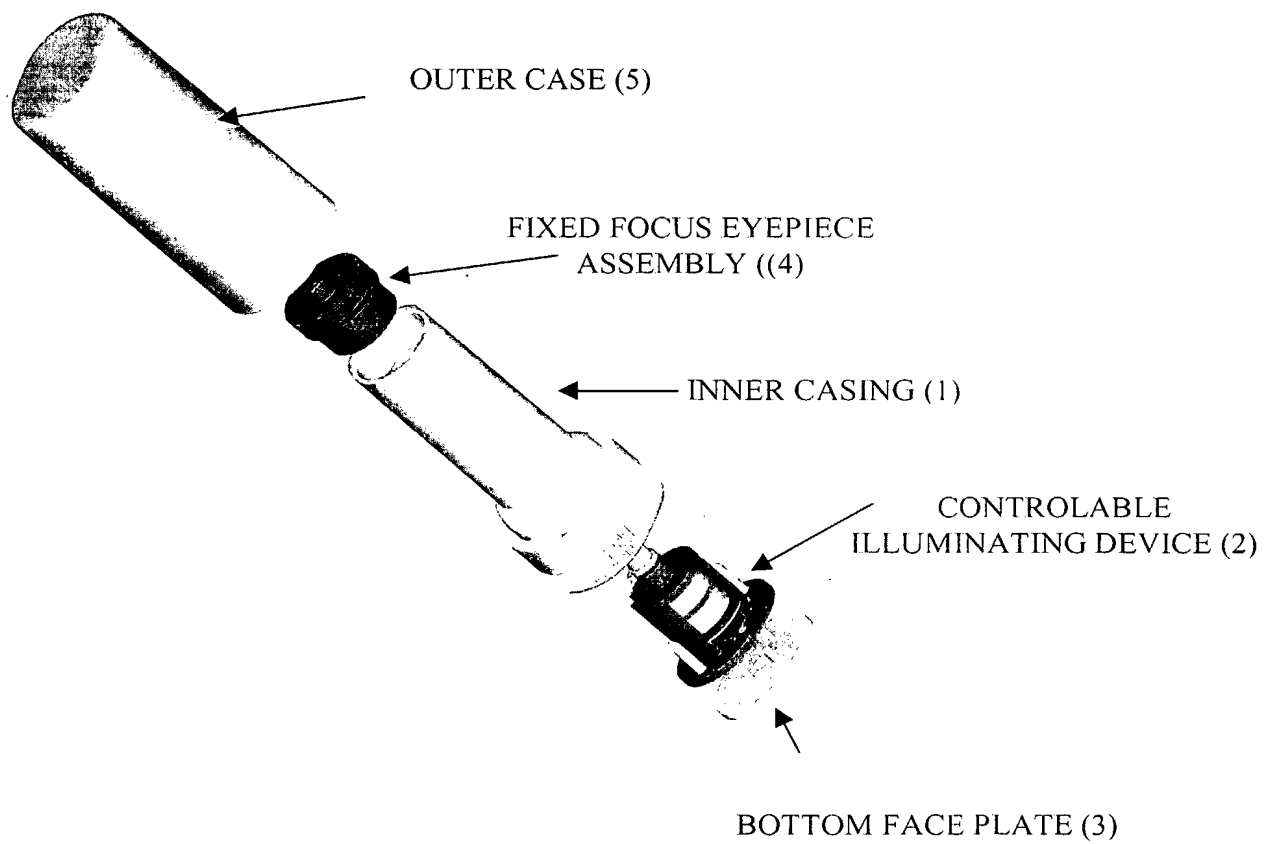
EXPLODED VIEW OF THE OUTER CASE
